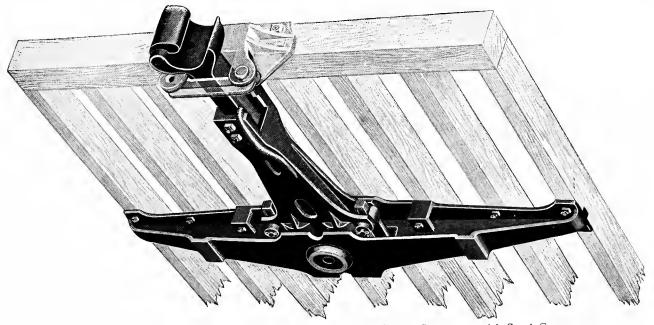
Commonwealth Cast Steel Transom Draft Gear. Commonwealth Steel Company.
